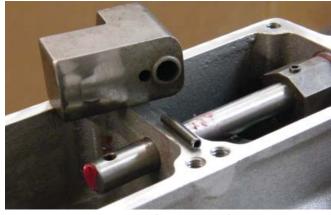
Here we have the rear shift block removed from the box and the pin driven out of the block.
